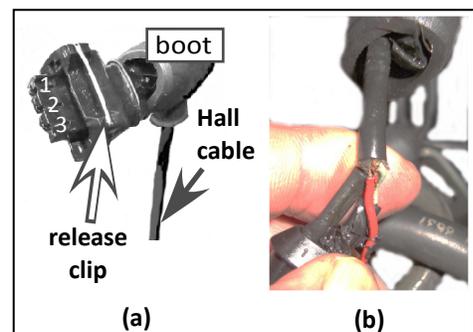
(a) The Hall plug showing the connector terminals, rubber boot, cable, and release clip. Terminal 3 faces passenger side when plug is connected. (b) Exposed strands of the Hall plug wires, where the insulation had worn away from oil, heat, and handling, led to a short circuit.
